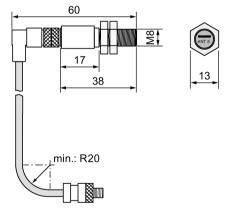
Dimension drawing ANT 8 (all values in mm)
